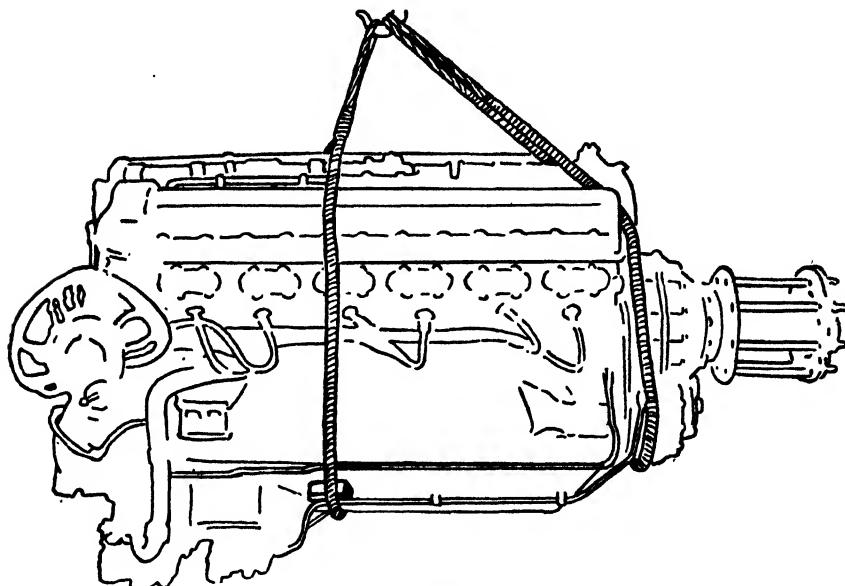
Position of Ropes when Slinging, showing Packing.
